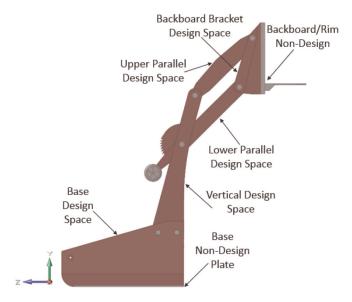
Portable Basketball Hoop System Design and Design Spaces
